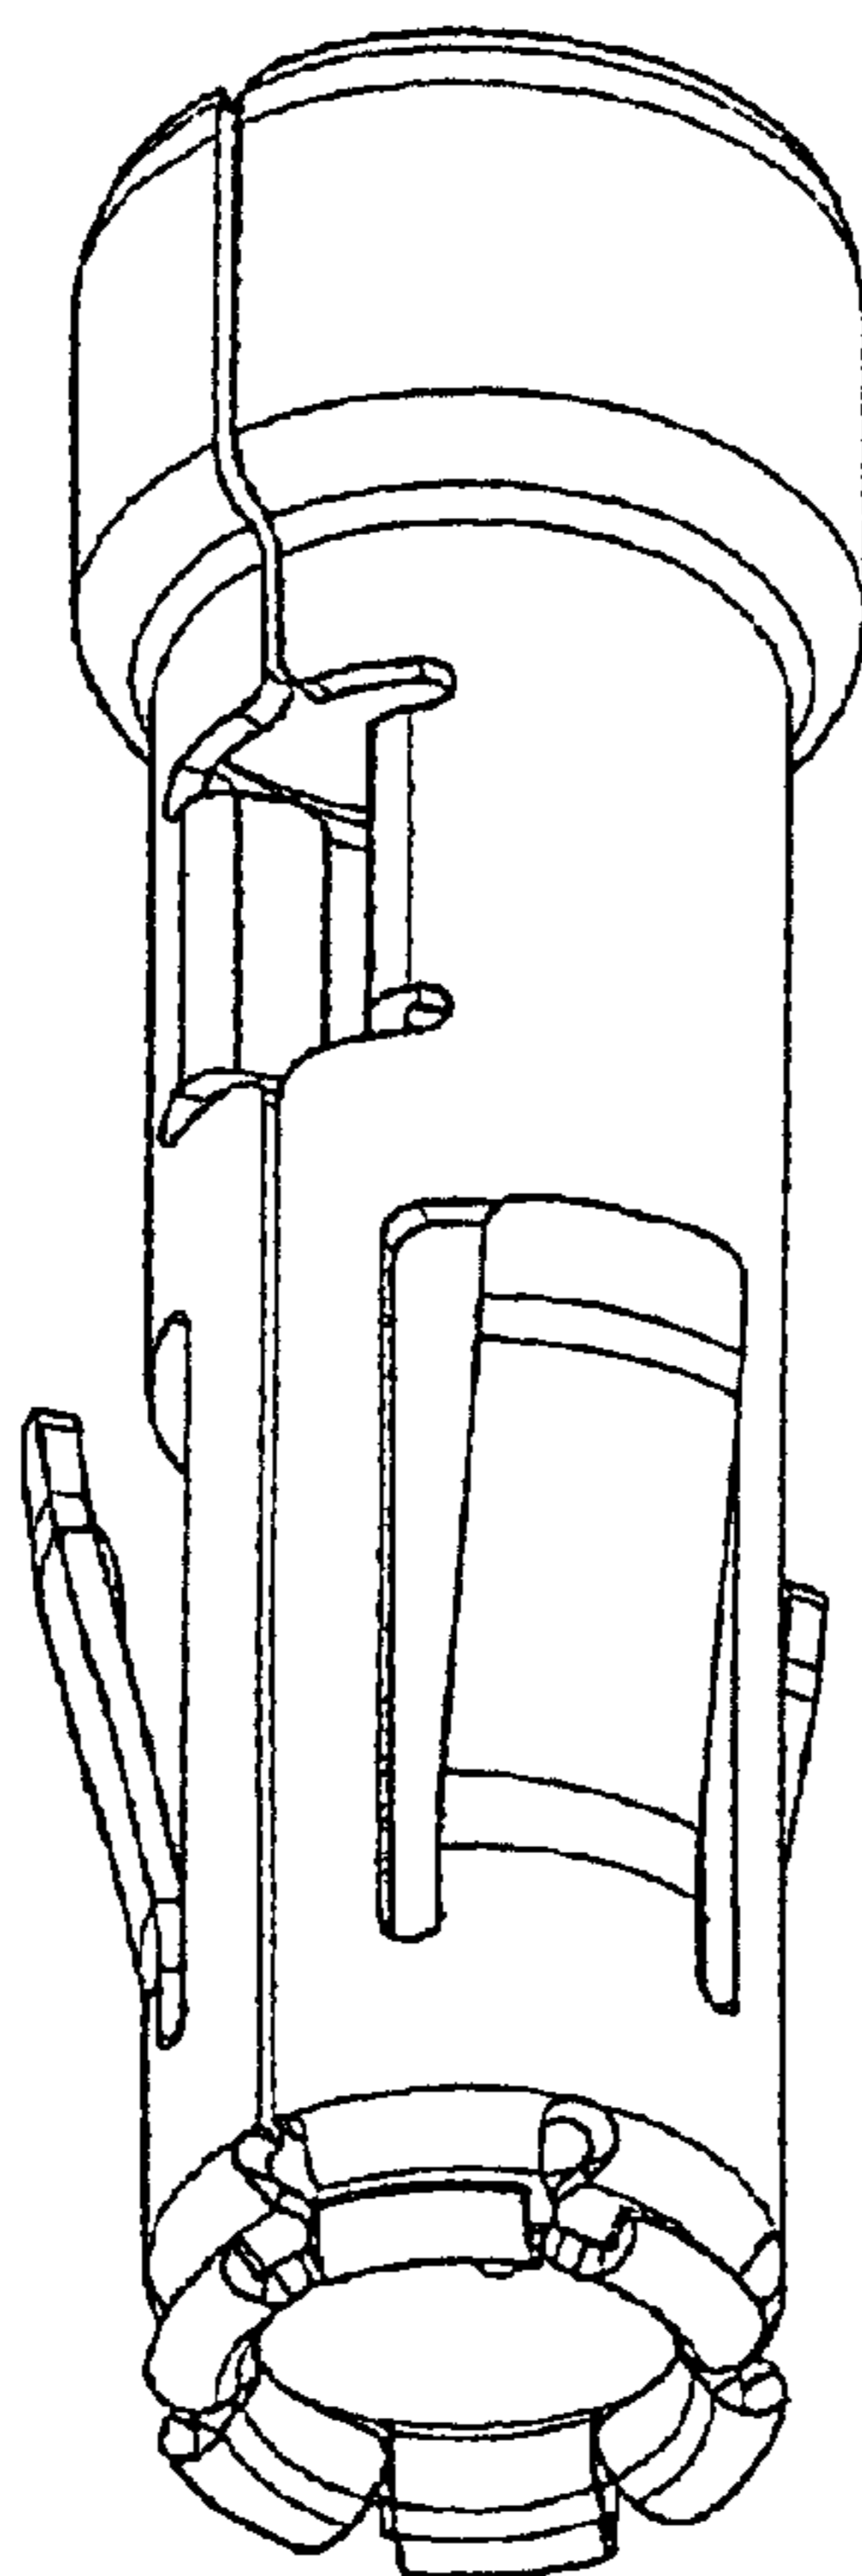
is a left side elevation view thereof, the right side elevation view being a mirror image thereof.
